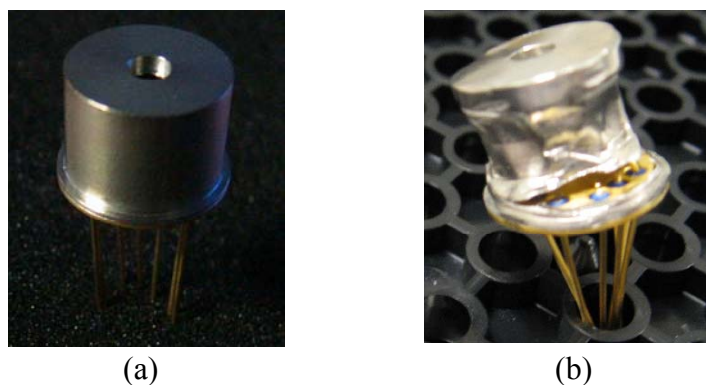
TO-cap (a) Before clamping test, and (b) After clamping test
